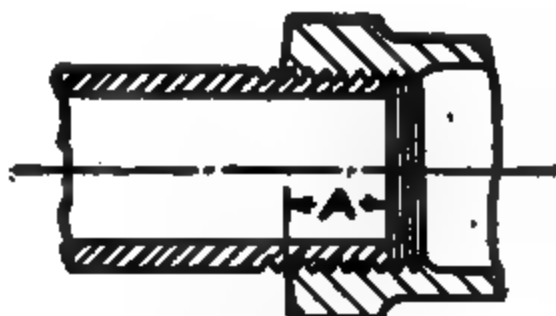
,302.—Screwed joint made up showing length A, of thread on pipe that is screwed into valves or fittings to make a tight joint, according to table by Crane Co. on page 2,903.
